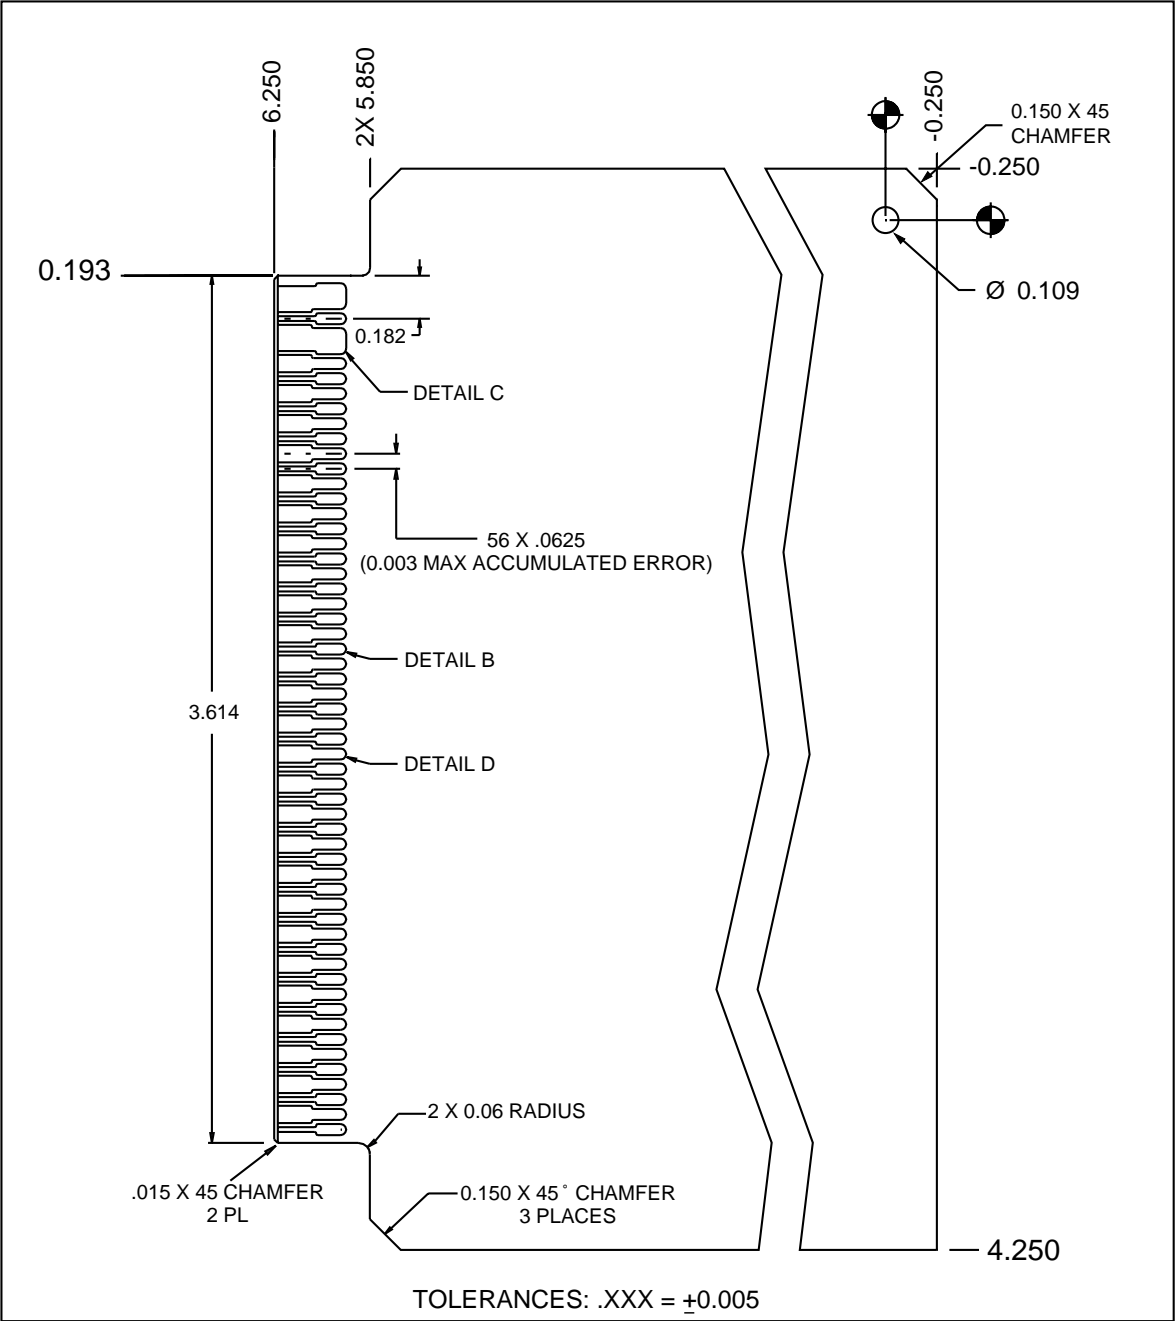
STD 32 P/E Board Fabrication (without Extensions).
